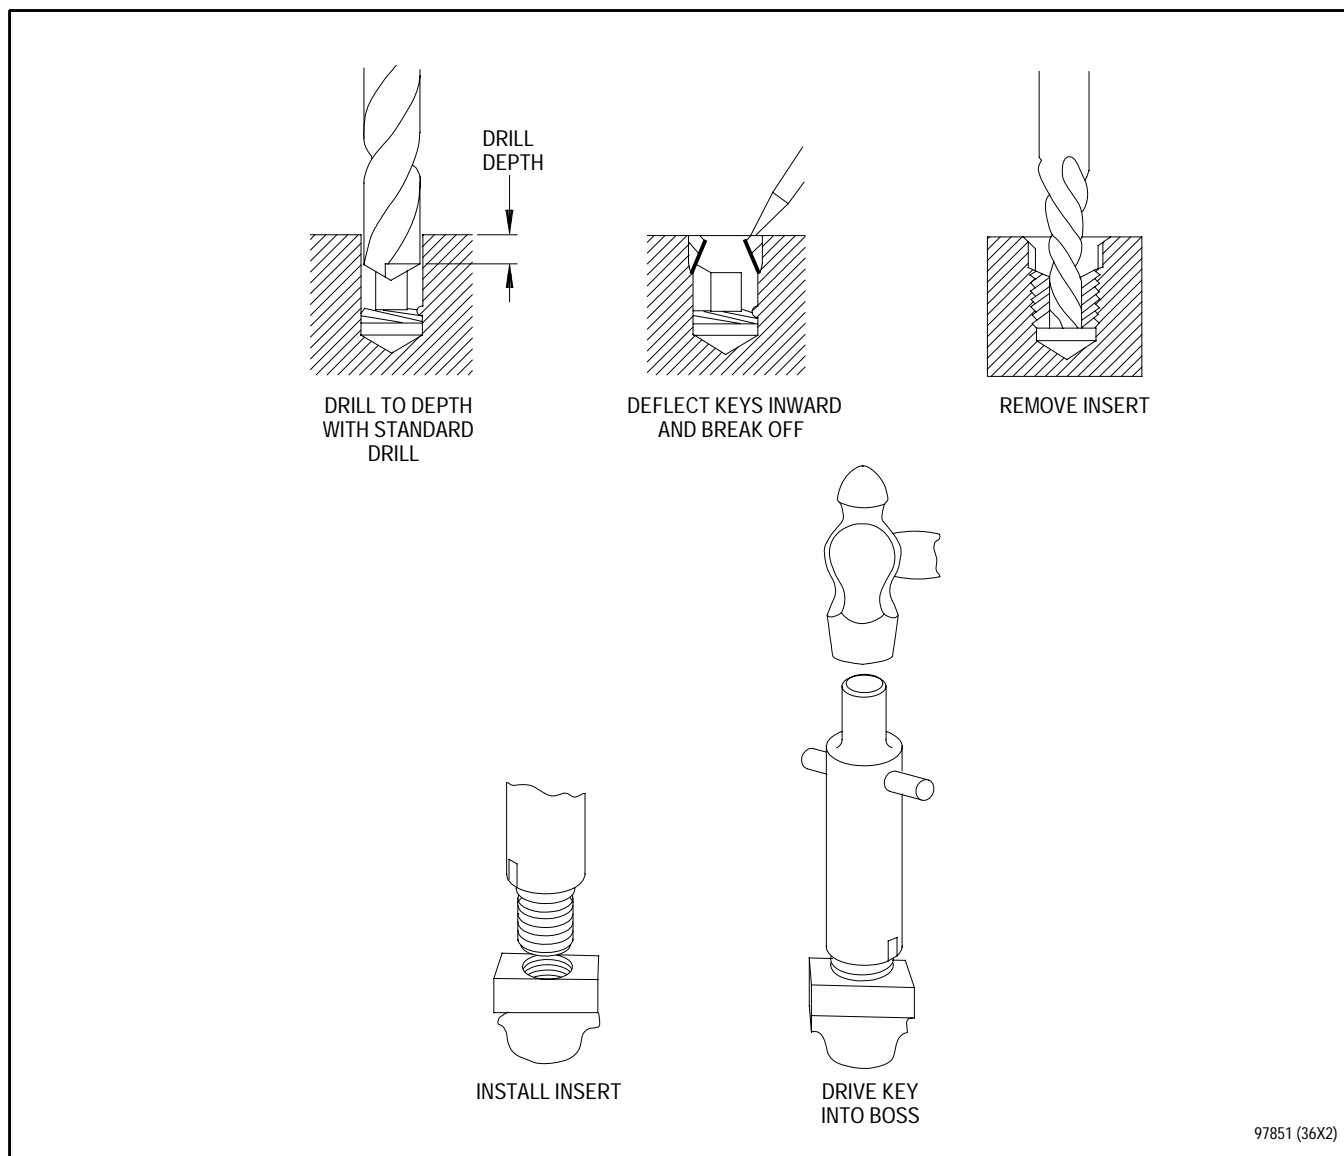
Compressor Intermediate Case - Self-Locking Screw Thread Insert Replacement (Sheet 2 of 2)
